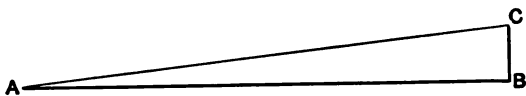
Laying out the Clearance Angle for a Square-Thread Tool
